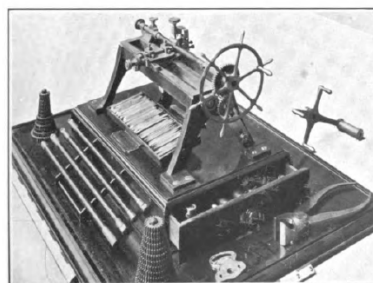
MAUDSLAY'S SCREW-CUTTING LATHE
